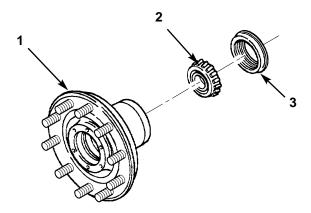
Removing Bearing Seal and Inner Bearing Cone.
